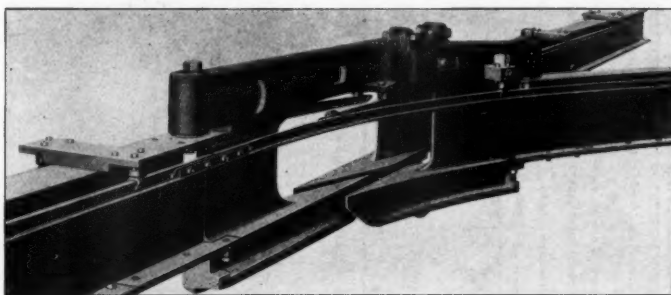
FIXED-TONGUE TRACK SWITCH FOR MONORAIL TRACK
